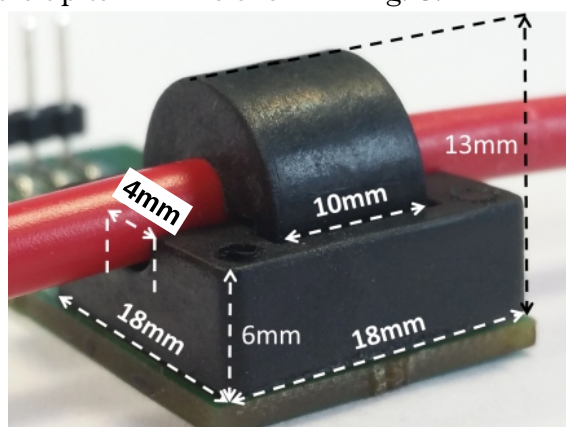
Size of the CO-4-0.8 "Clamp-On" shield assembled onto a PCB
